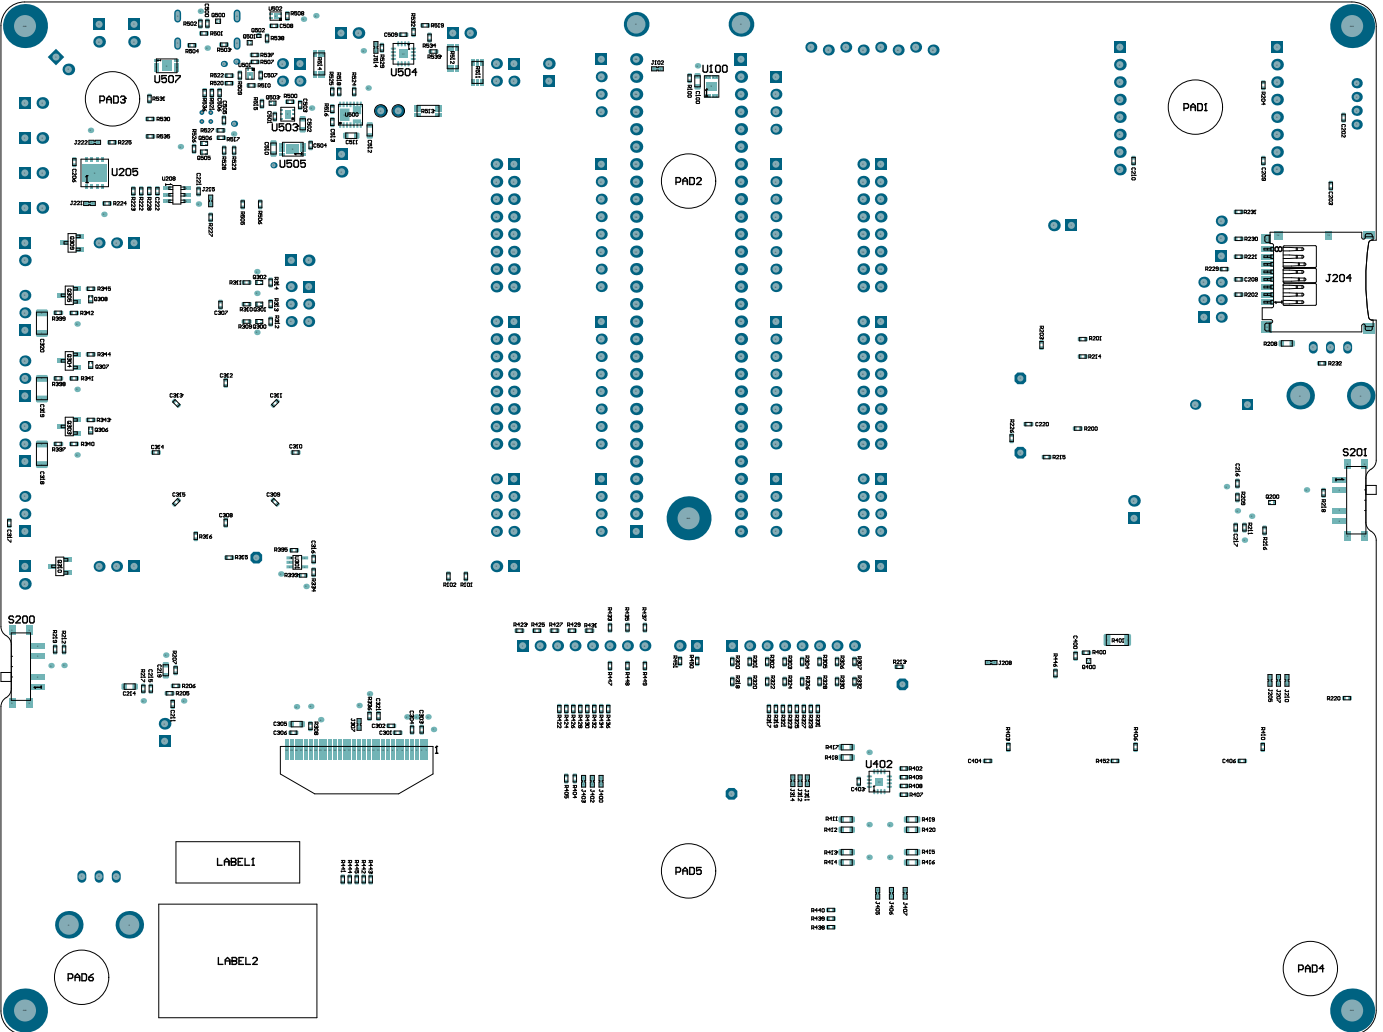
Curiosity Nano Explorer Bottom Assembly
